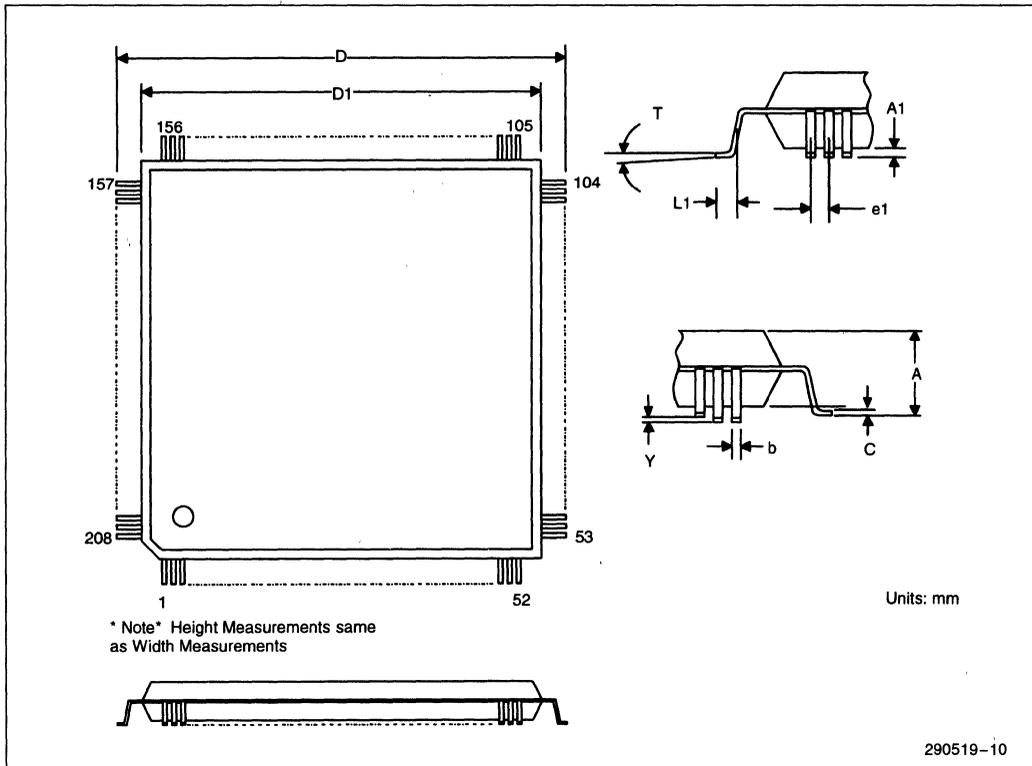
208-Pin Quad Flat Pack (QFP) Dimensions
